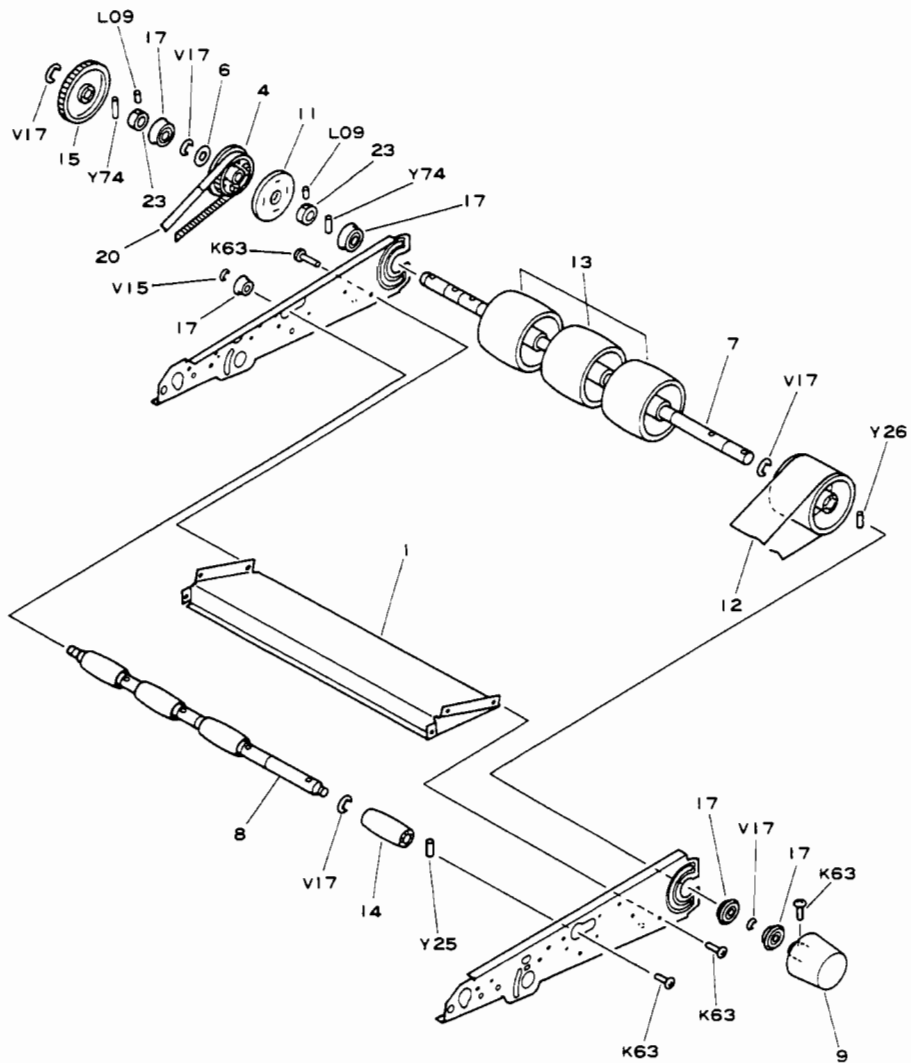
6. Belt Feeder Assembly (1 of 2)
